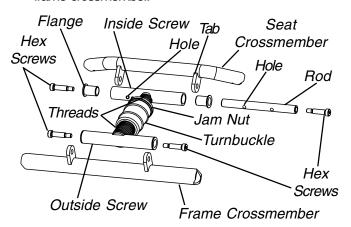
REPLACING TURNBUCKLE ASSEMBLY - A-6/A-6S ONLY
